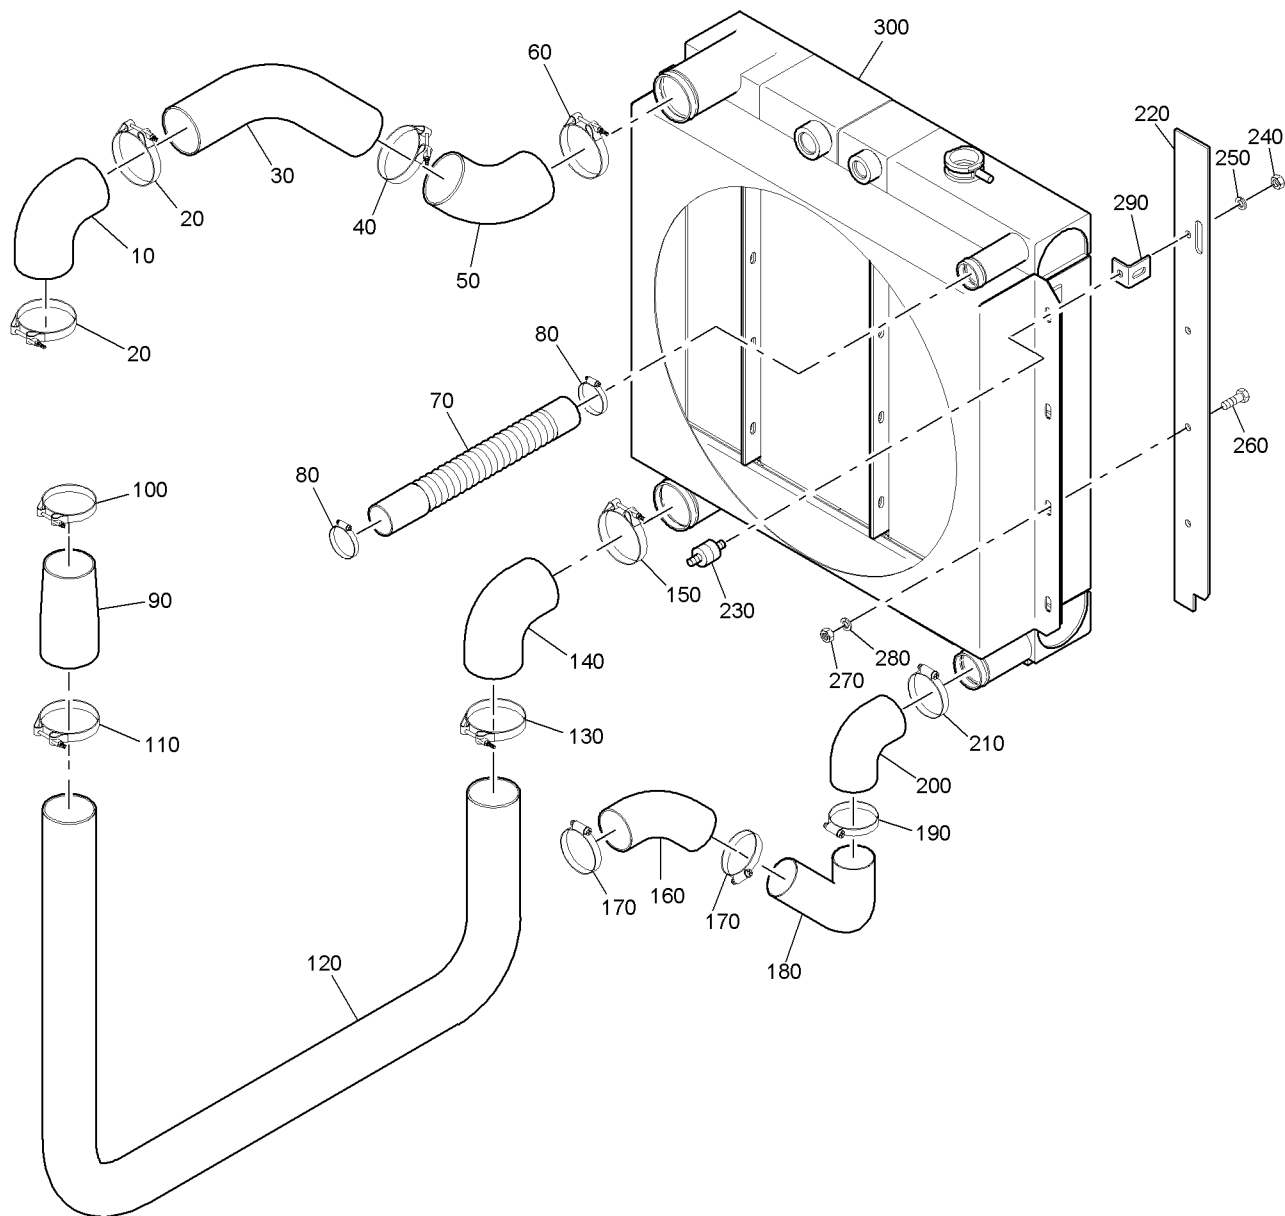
RADIATOR AND HOSE ASSEMBLY
